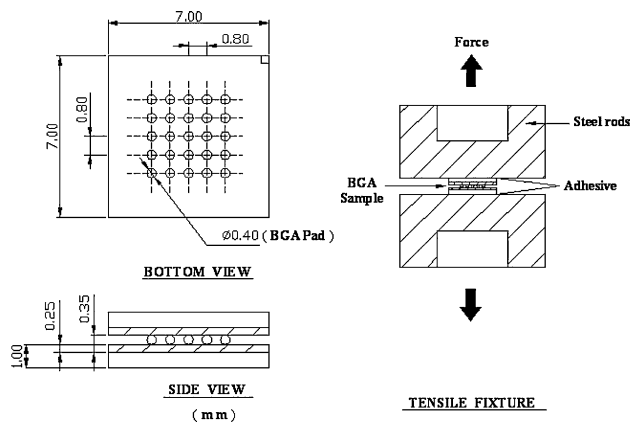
Geometry and dimensions of BGA specimens for tensile tests
